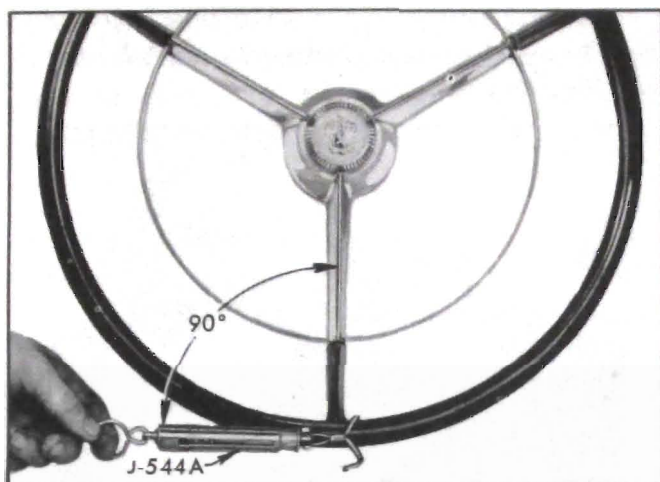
Checking Thrust Bearing or Lash Adjustment with Scale
